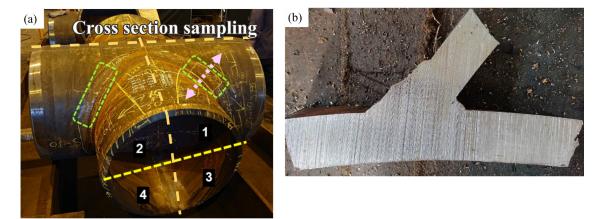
Sampling preparation of the welded node. (a) cutting indications, (b) cross-section of the weld.
